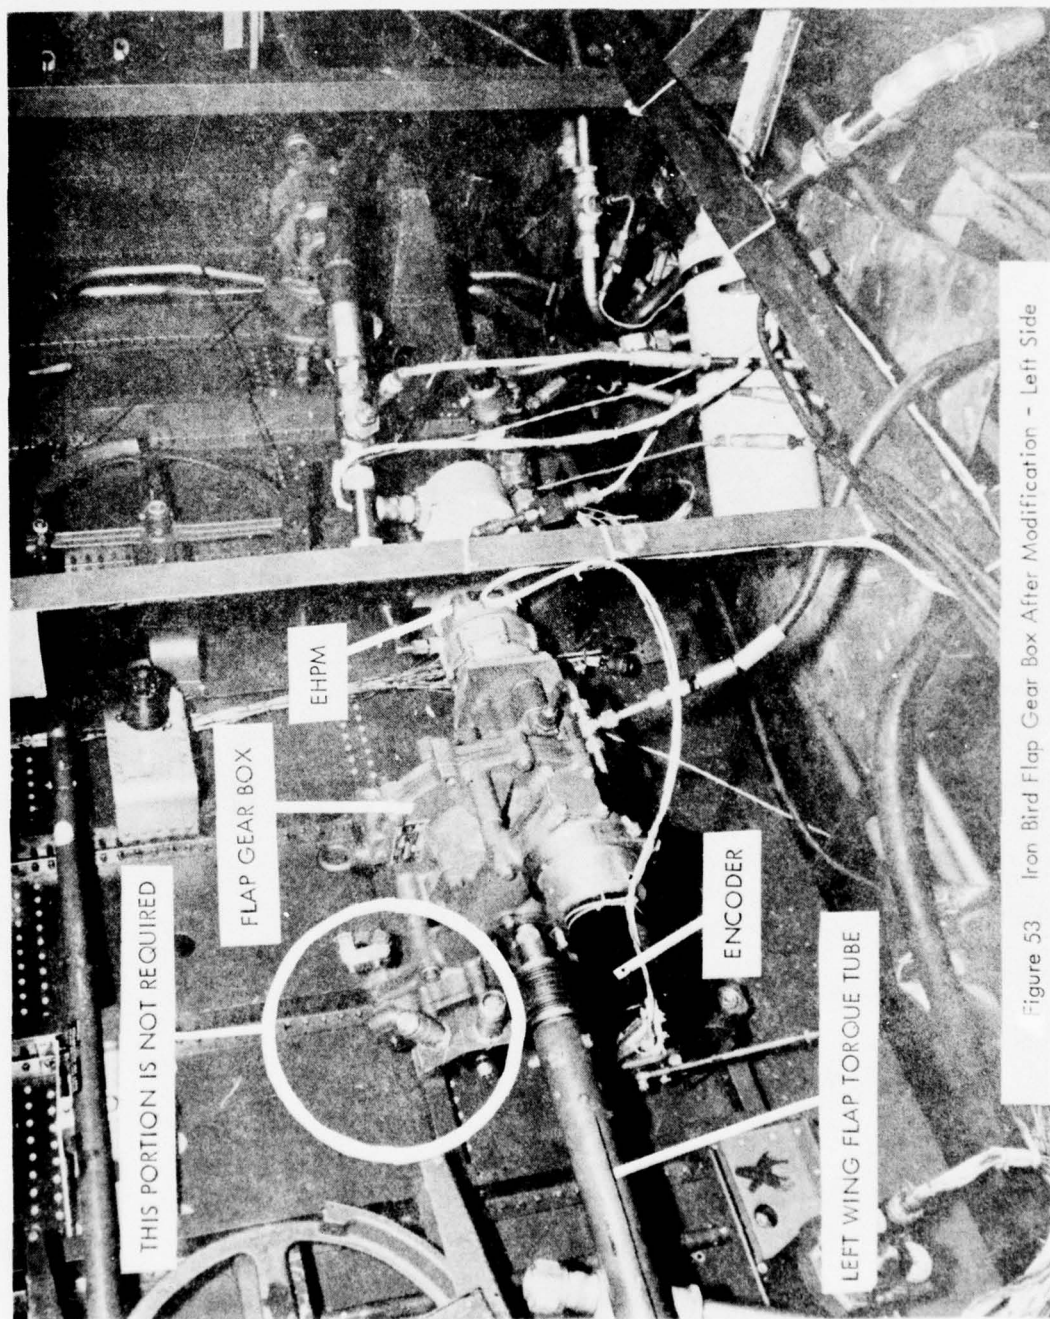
Iron Bird Flap Gear Box After Modification - Left Side
